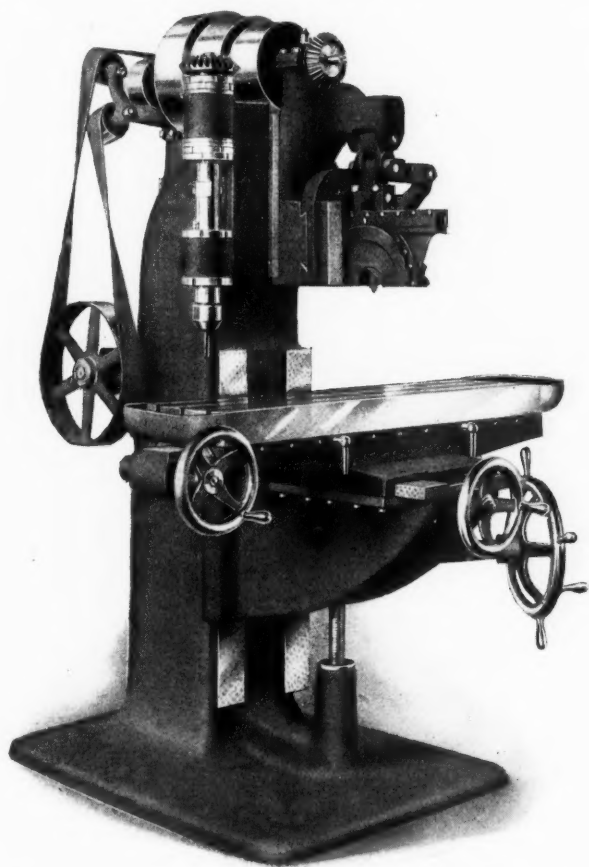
Die-sinking Machine manufactured by Melling-Northrup Co.
